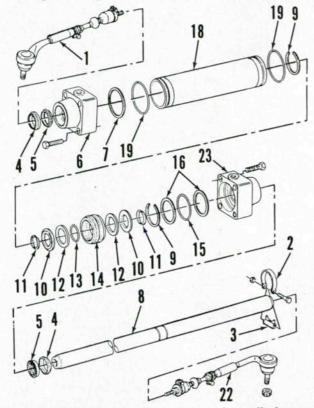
Exploded view of power steering cylinder used on tractors equipped with APL-365 front drive axle.
